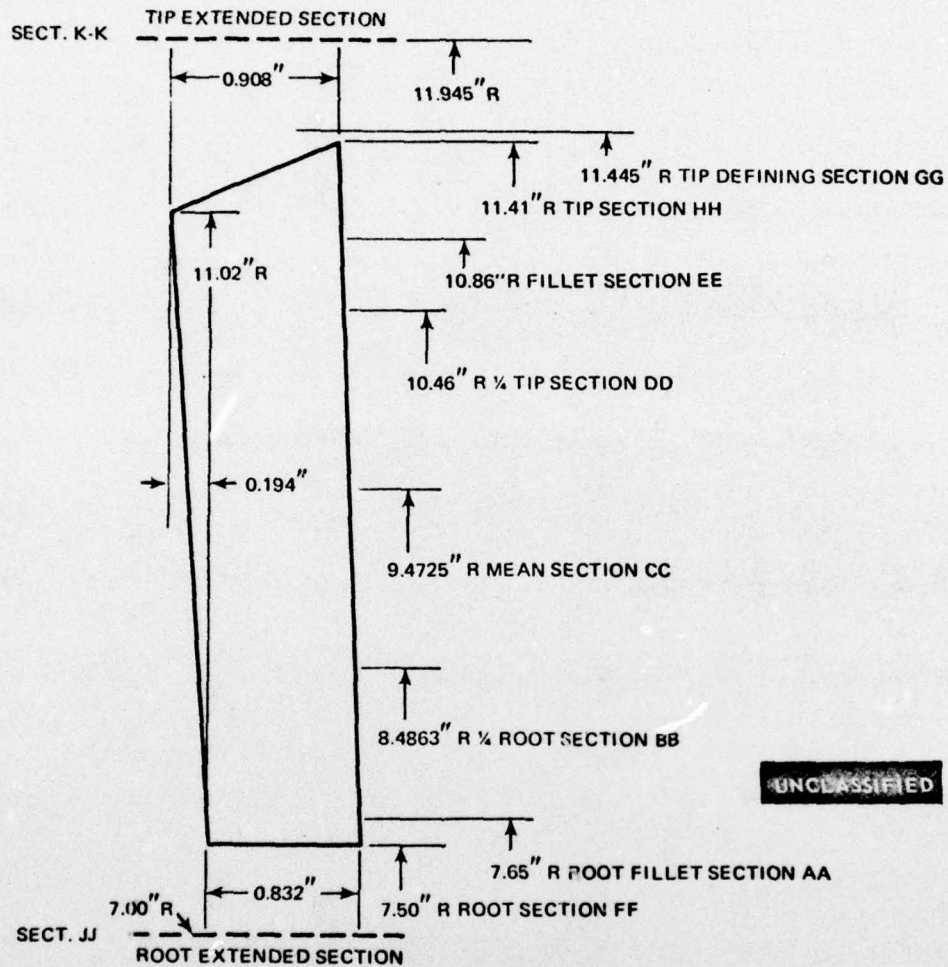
Elevation and Section Location of Second Vane, Recambering Design B
